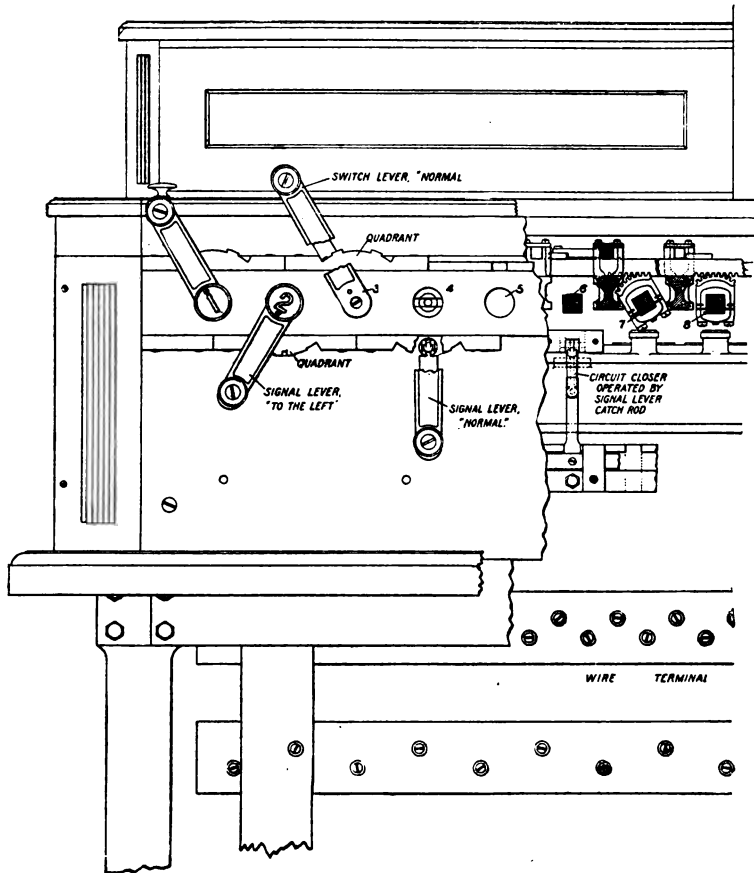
Part of *Electro-Pneumatic Interlocking Machine
